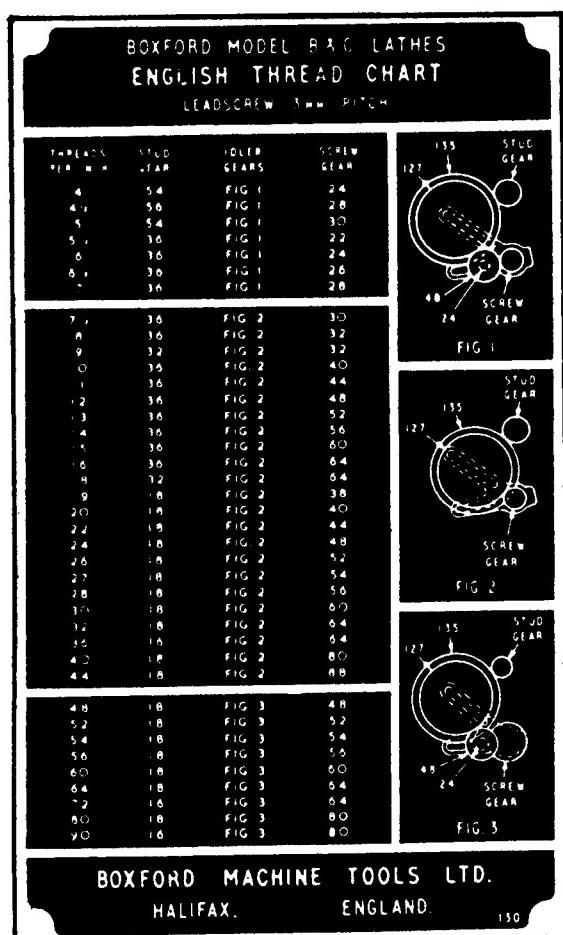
English Thread Chart for Standard Change Gear Lathes with Metric Leadscrew
